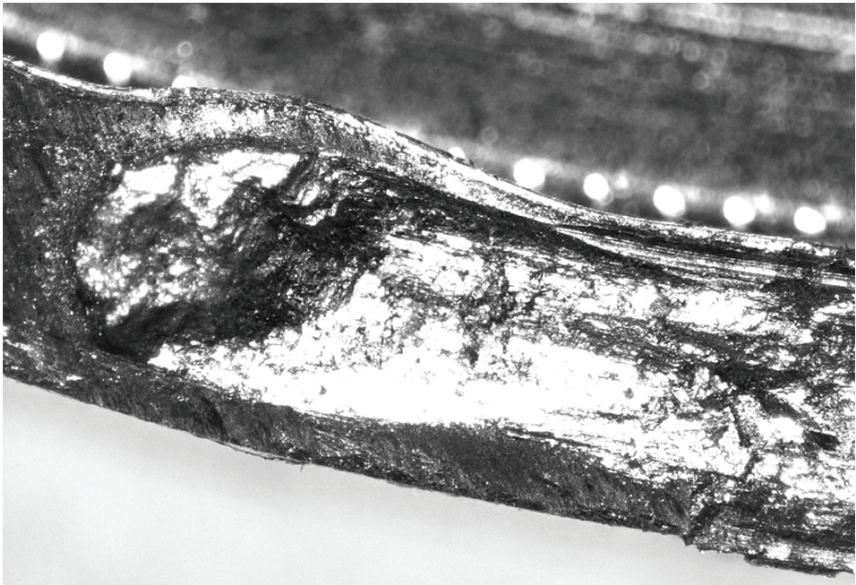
Metal transfer at the specimen surface after fretting fatigue failure.
